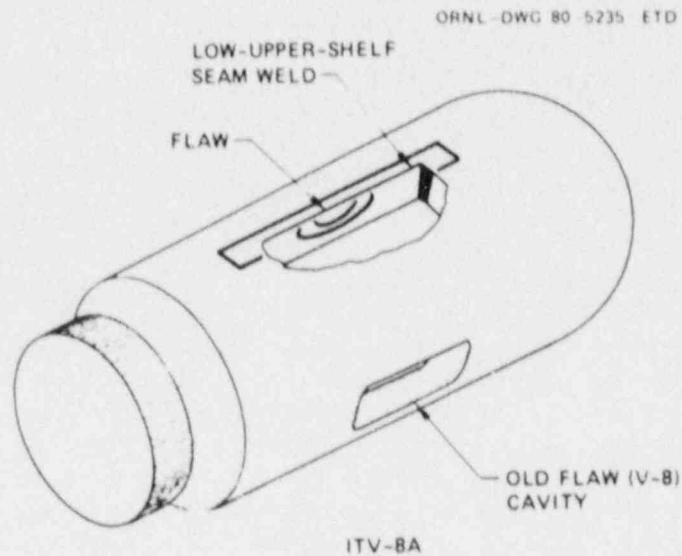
Schematic of vessel V-8A showing location of flaw relative to special seam weld.
